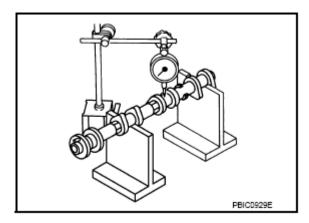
Checking Camshaft Runout Using Dial Indicator Courtesy of NISSAN NORTH AMERICA, INC.
